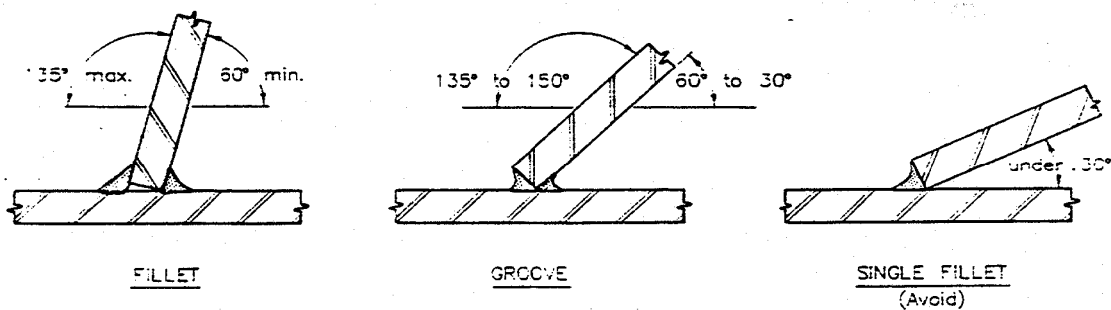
T JOINT WELD LIMITS
